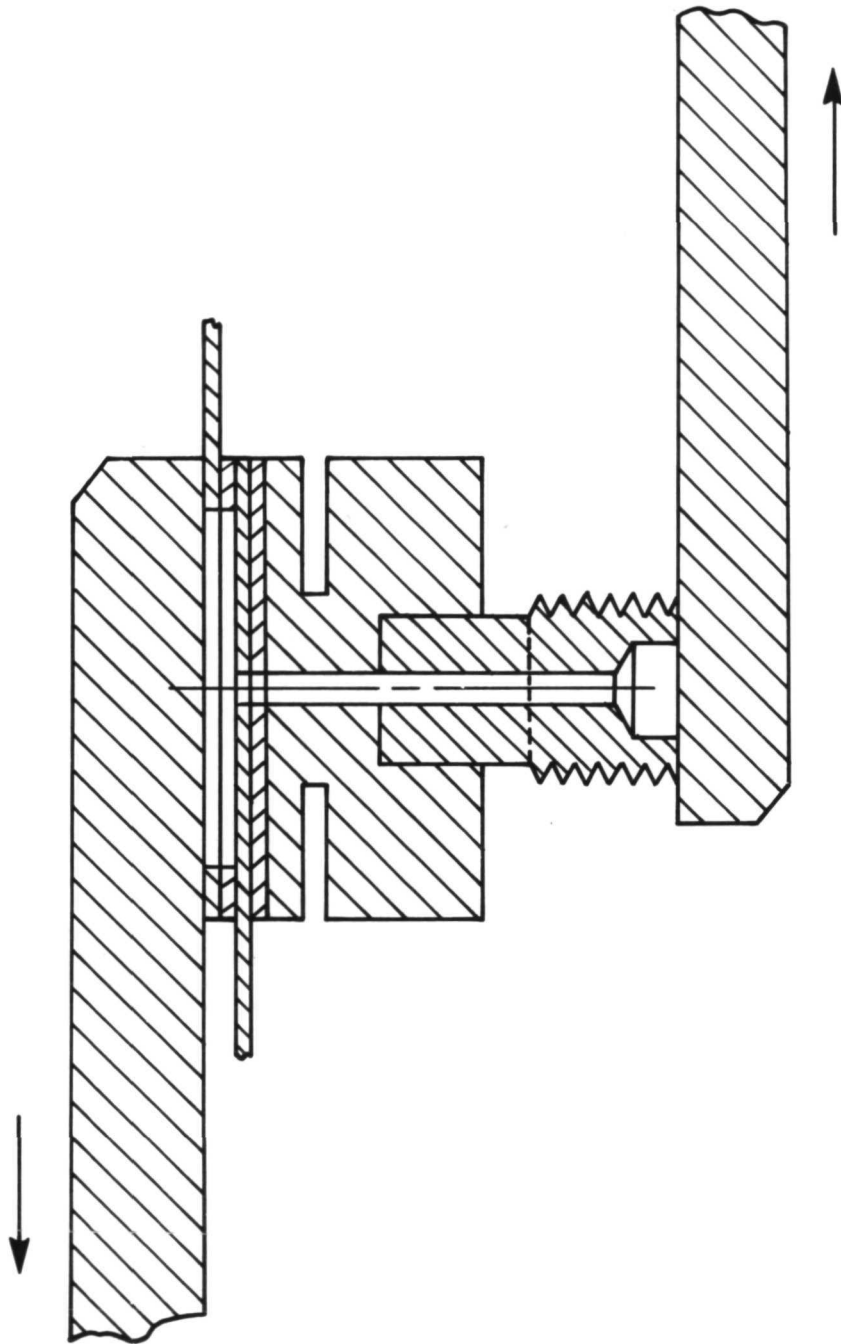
Two Piece T-Mount Stud - Cold Stack Design
